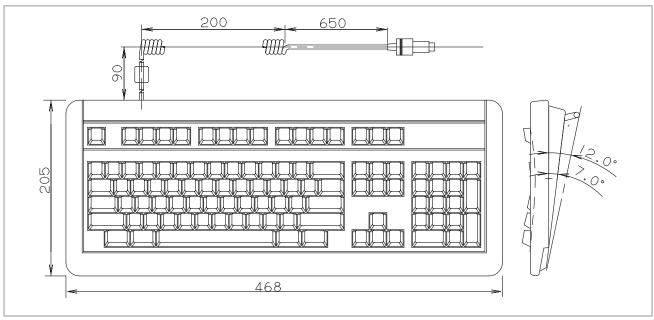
(a) External dimensions of 101-type full keyboard (English) Specification No.: A86L-0001-0210
